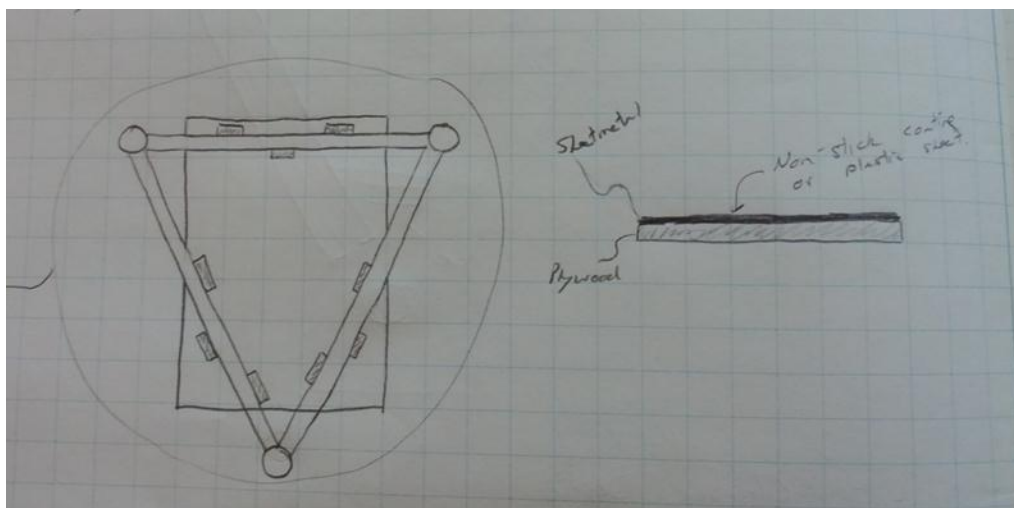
Fixture design using a steel plate with magnets to hold supporting tubes in place.
